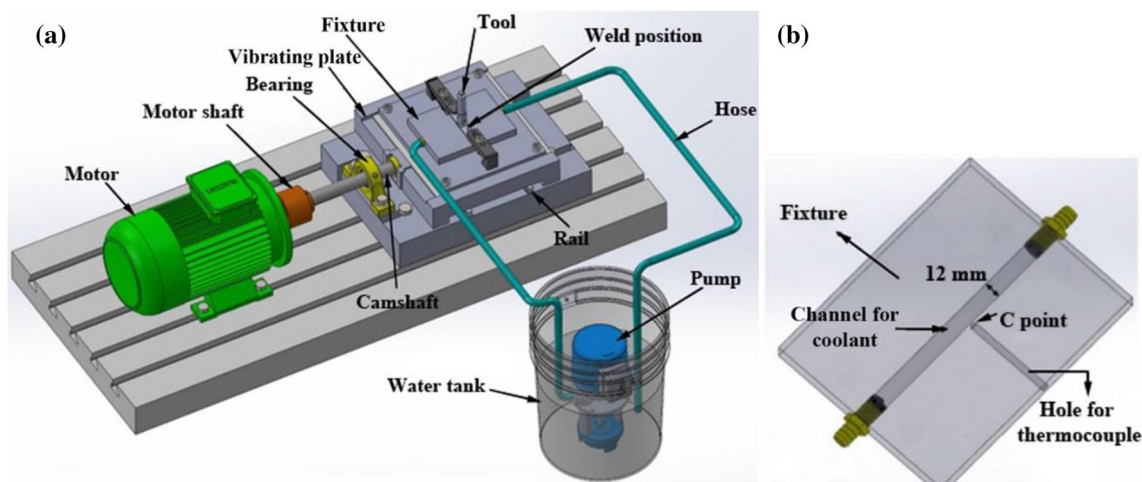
a Schematic design of machine manufactured for FSSVW with the application of coolant, b design of the fixture
